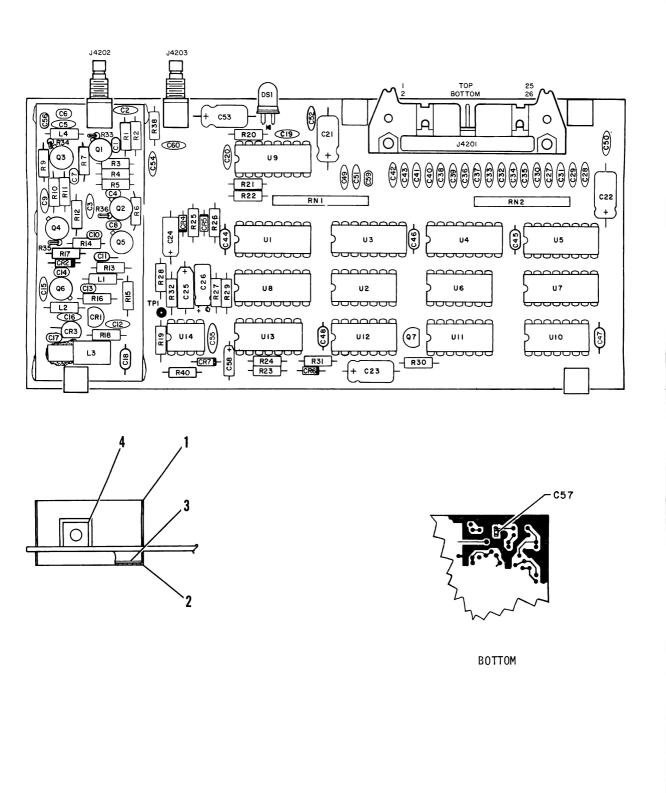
LOW LOOP PC BOARD ASSEMBLY
